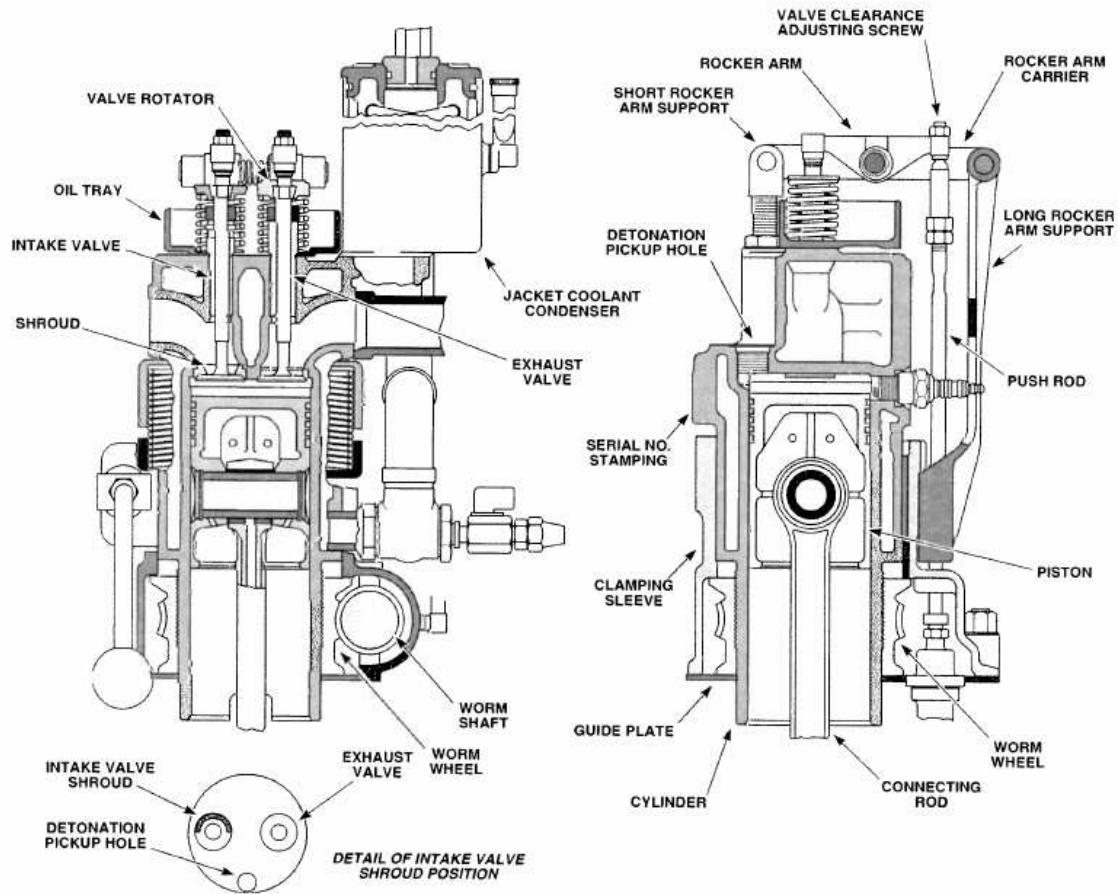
Cylinder and Clamping Sleeve Sections, Waukesha F-2 CFR [22]
